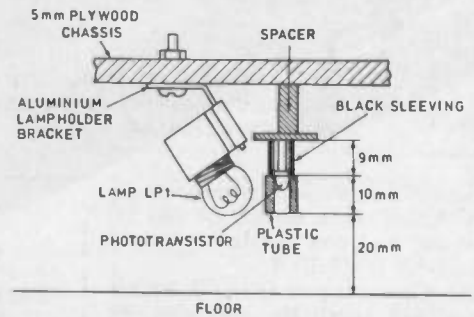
(right). Details of the line sensor assembly. The sensor is mounted beneath the vehicle - see text.
